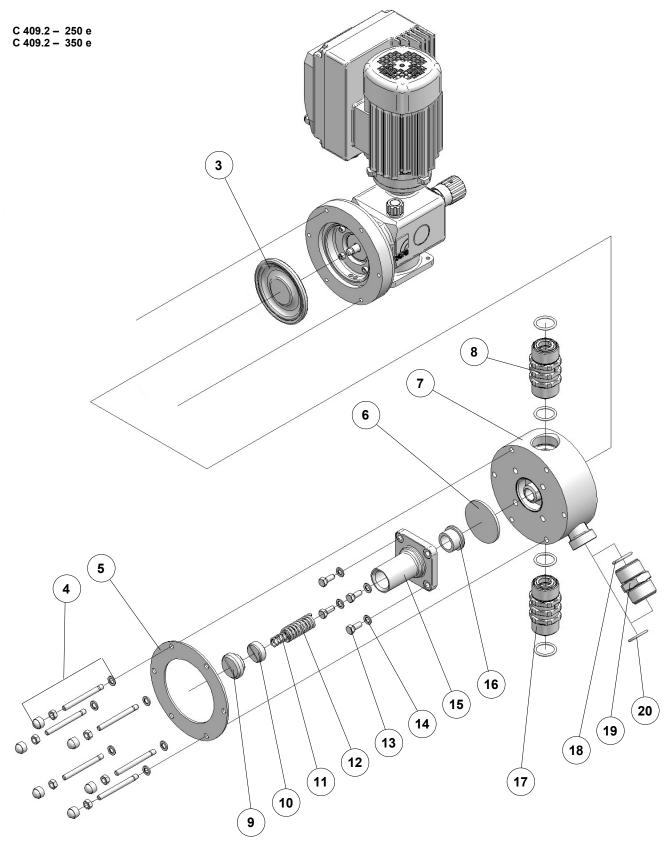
Spare- and wearing parts (C 409.2-250 e ...-350 e with integrated overflow valve)
